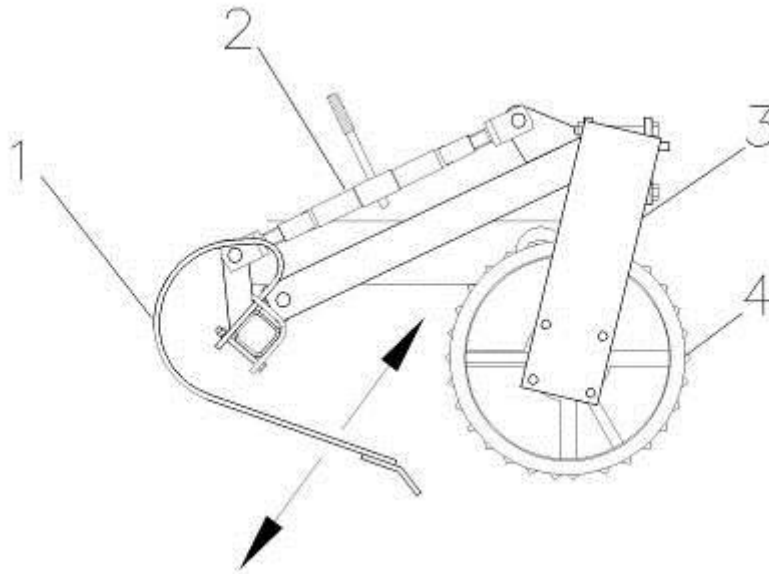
Adjustment of the smoothing harrow: 1 - smoothing harrow, 2 - turnbuckle, 3 - roller clamp, 4 - roller.
